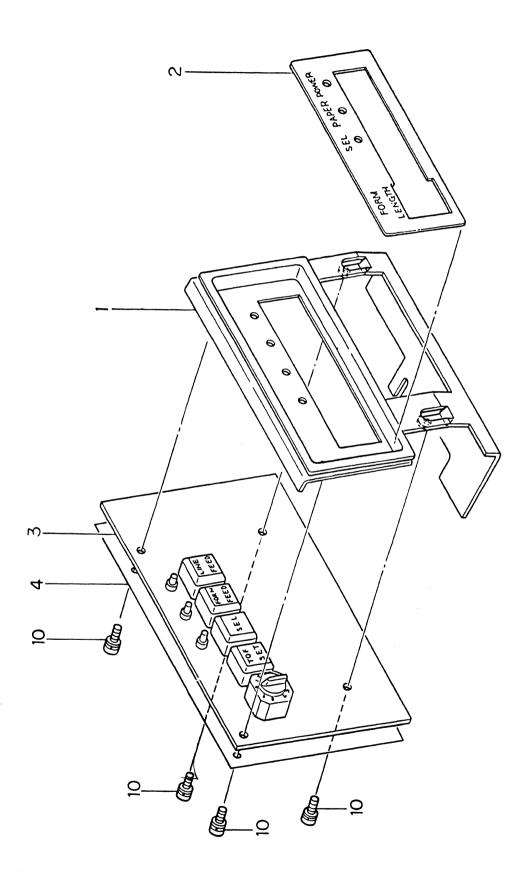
Operation Panel Assembly (4LM-59688)
